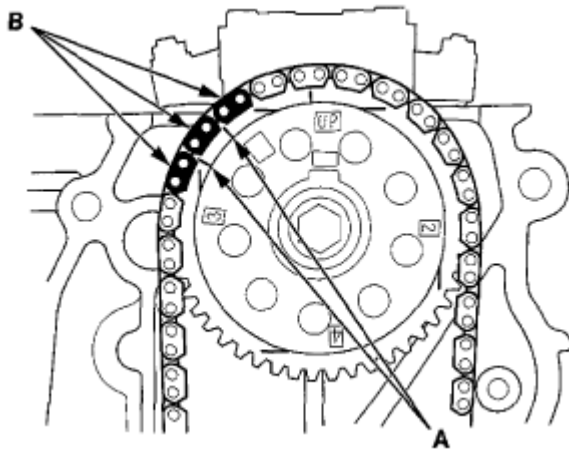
Aligning Camshaft Sprocket With Pointers With Three Colored Pieces
